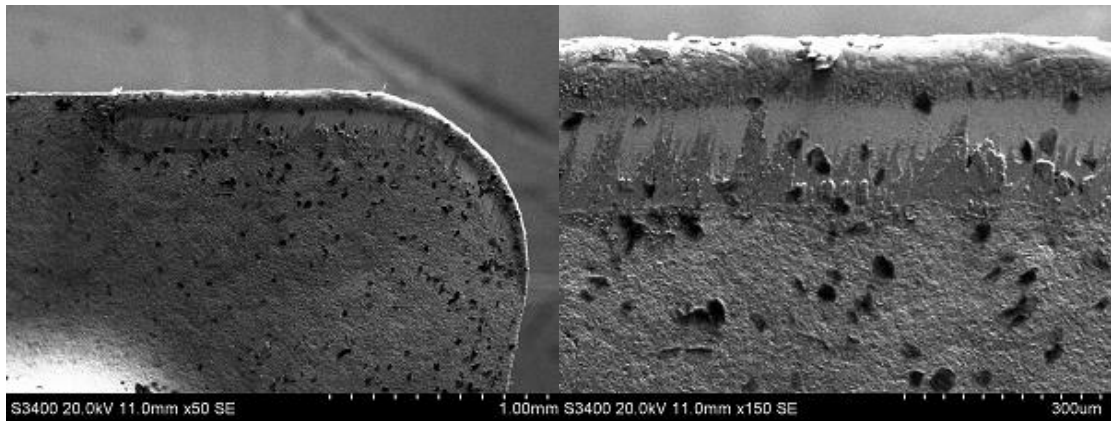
SEM images of cutting tool when cutting speed is 120m/min and feed rate is 0.15 mm/rev (left) and amplified part (right) after machining 10 cm<sup>3</sup>
